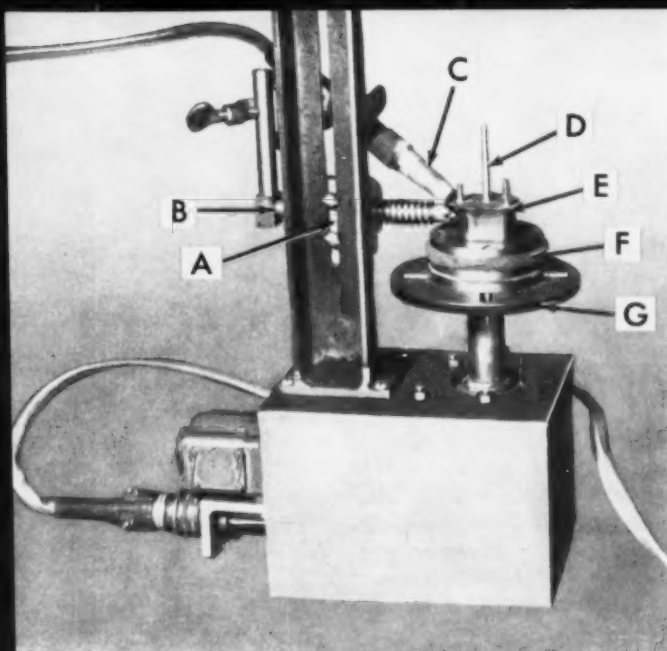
A Relay Container Is Shown in Welding Position. The follower bearing block is at A; the can follower and torch positioner at B; and the TIG welding torch at C; D is the relay vent tube. The edge to be welded is at E; the alternating rubber-steel ring mechanism for clamping is at F; and the rotary table is at G
